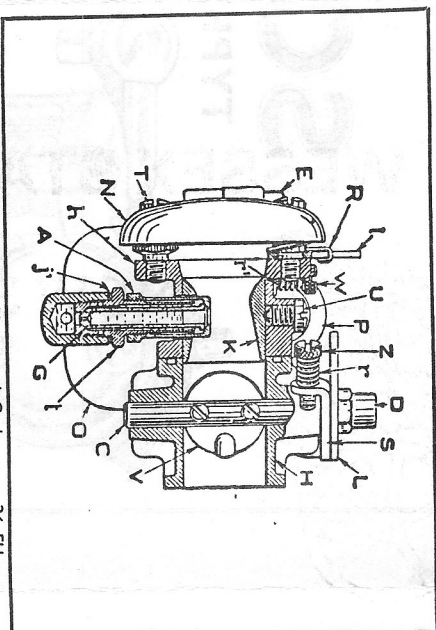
Section of the Horizontal Carburettor 26 FH.
